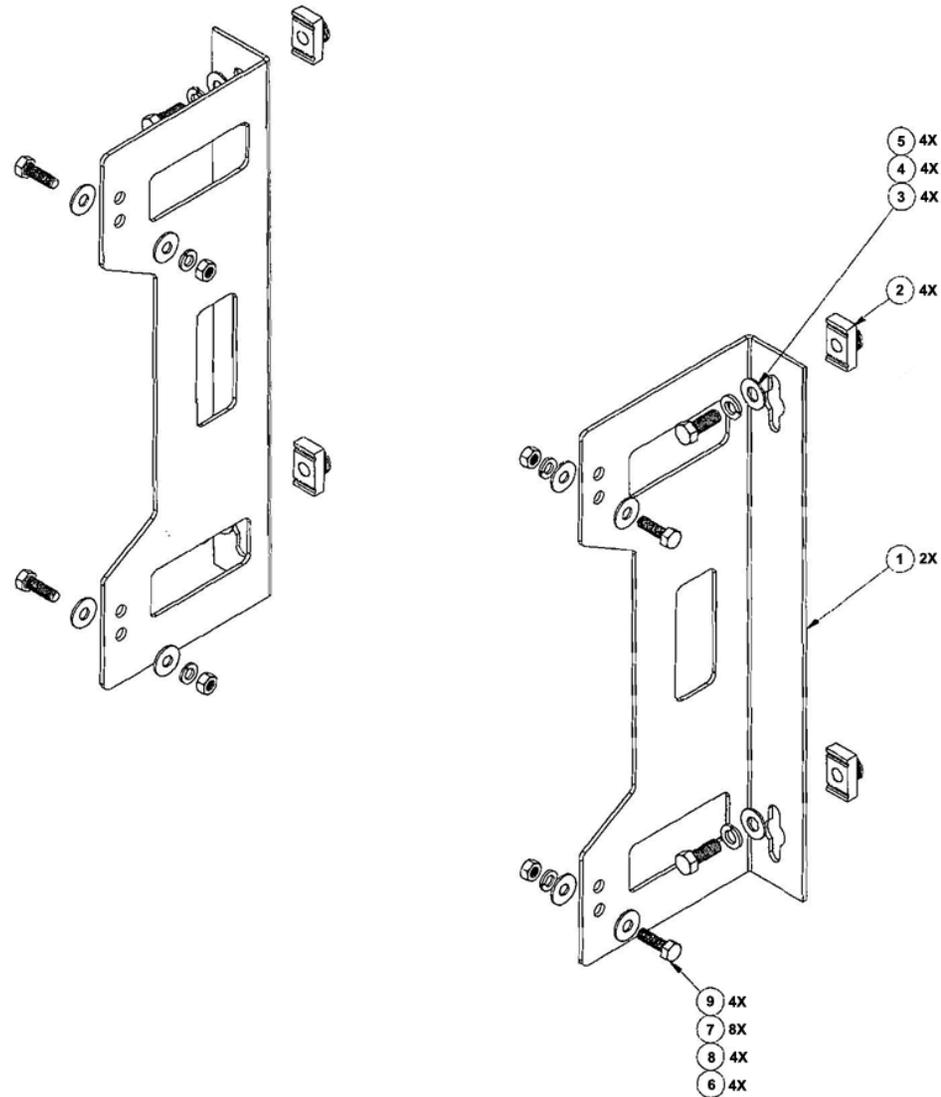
Uni-Strut Mount HPOD Mounting Bracket Kit (KT/12300-1)
